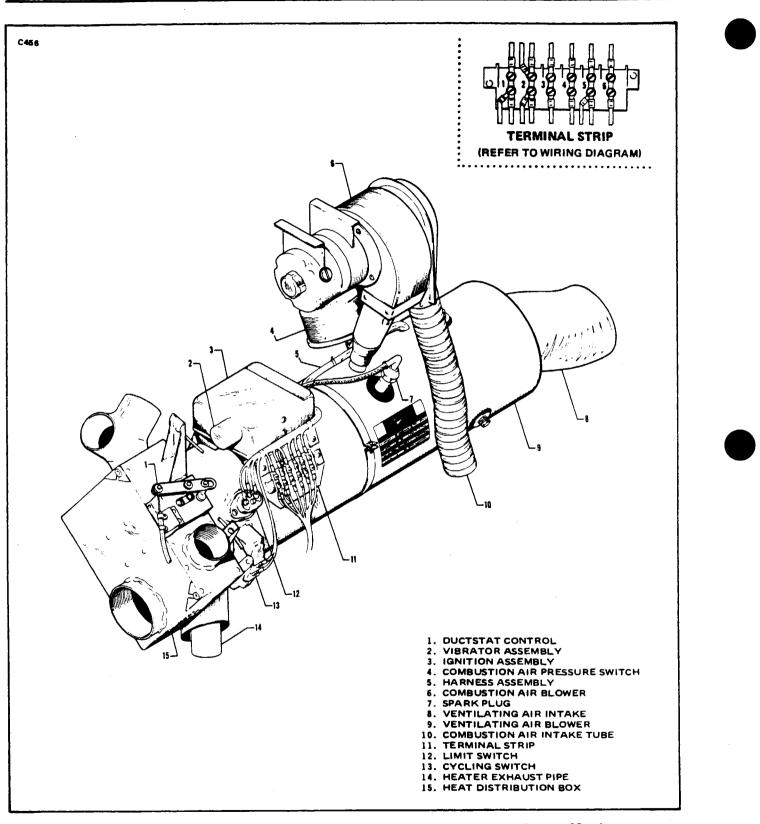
39D59 Heater Assembly and Combustion Air Blower, System No. 1
